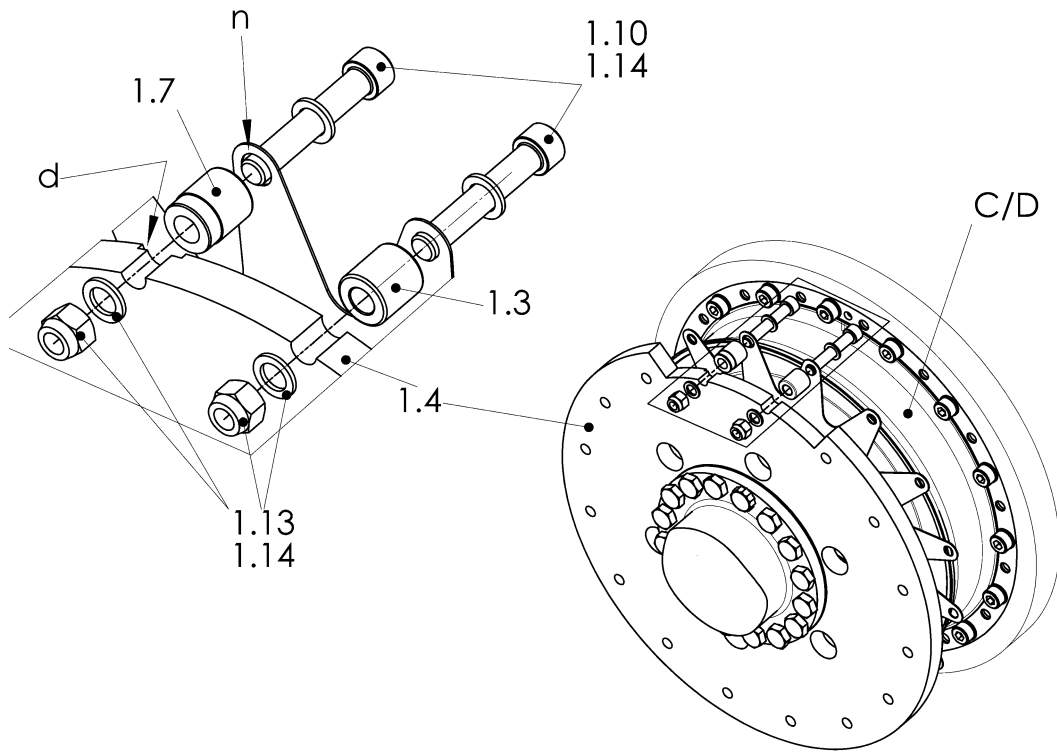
Connecting the pre-mounted rubber element assembly (C/D) and the adapter (1.4)
